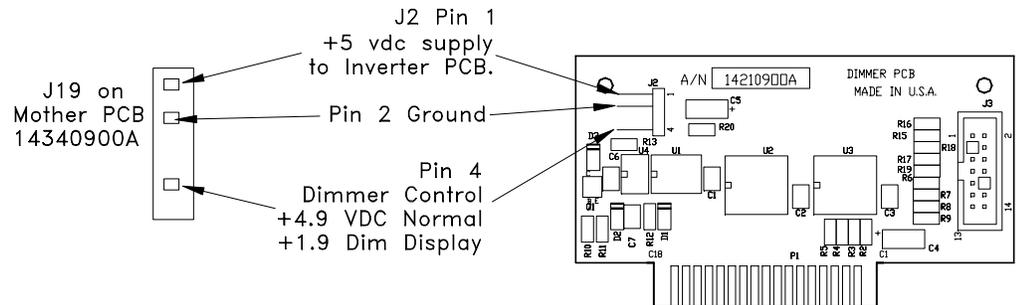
Dimmer Circuit Test Points at Mother PCB J19 and Dimmer PCB J2
